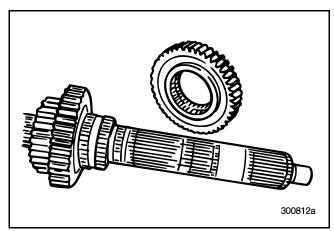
Removing First Speed Gear from Mainshaft (T313L/T318L Shown)
